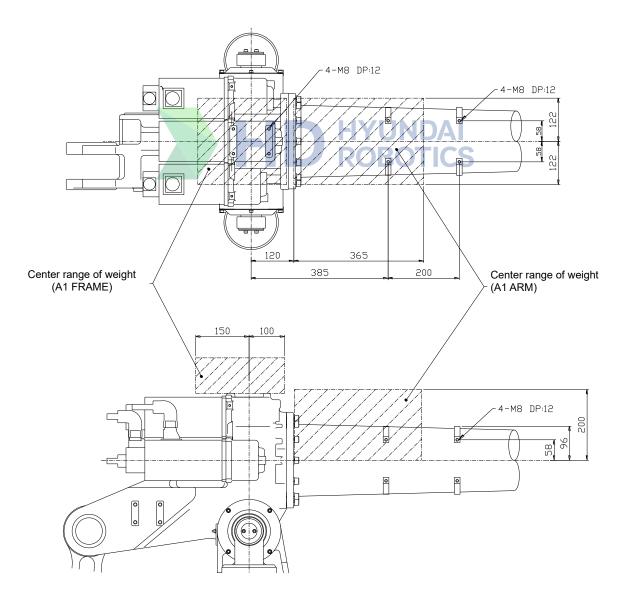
Detailed drawing of the part to which the upper arm is attached
